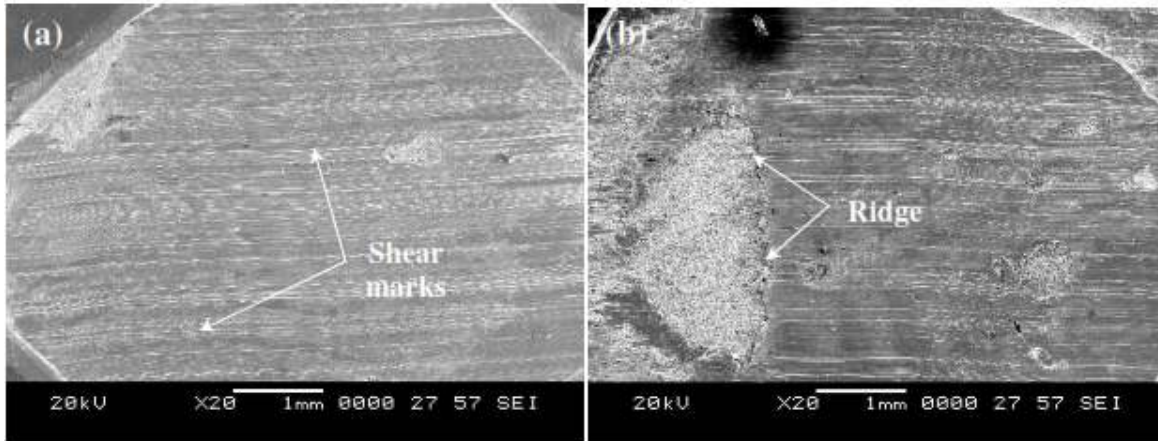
SEM micrographs of the fractured surfaces of Sn-2.5Ag-0.5Cu solder (a) smooth Cu substrate joint (b) rough Cu substrate joint
